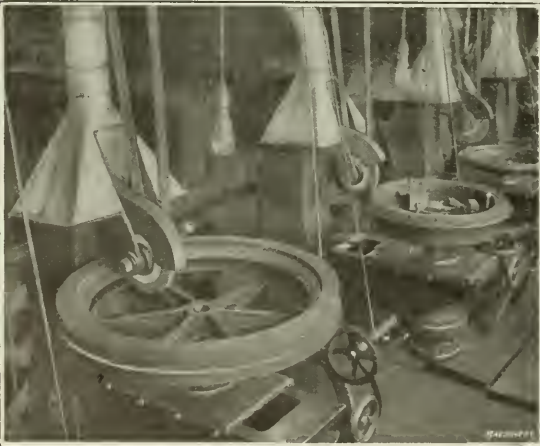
Special Grinding Machines for grinding Rings shown at C and D in Fig. 11
